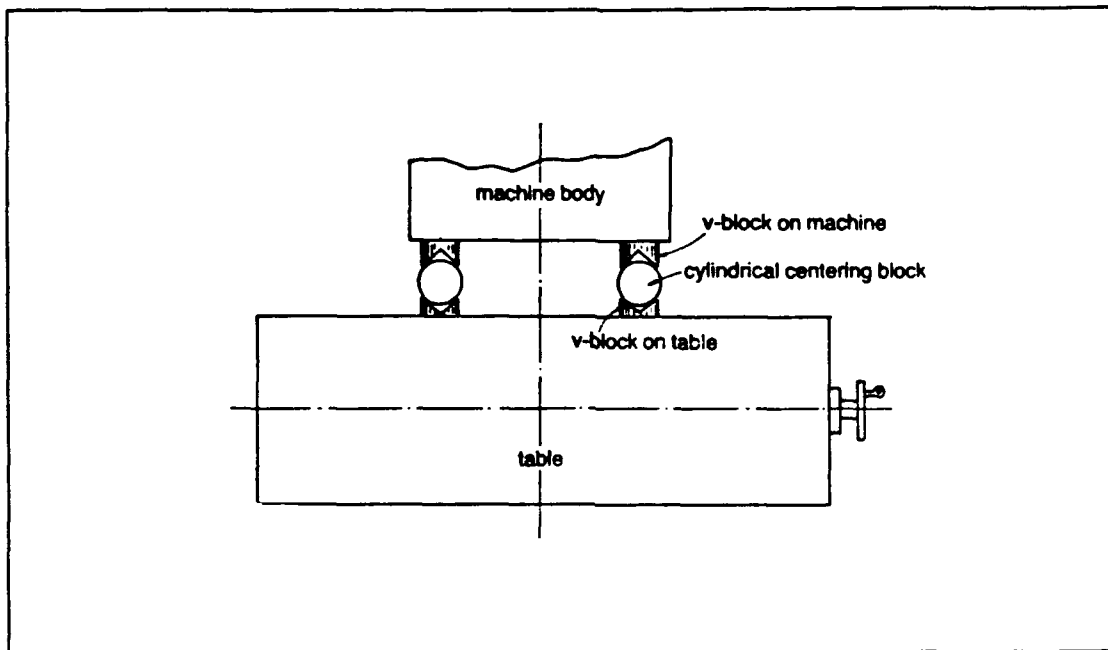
Making Imaginary Centers Visible on a Milling Machine (Top View)
